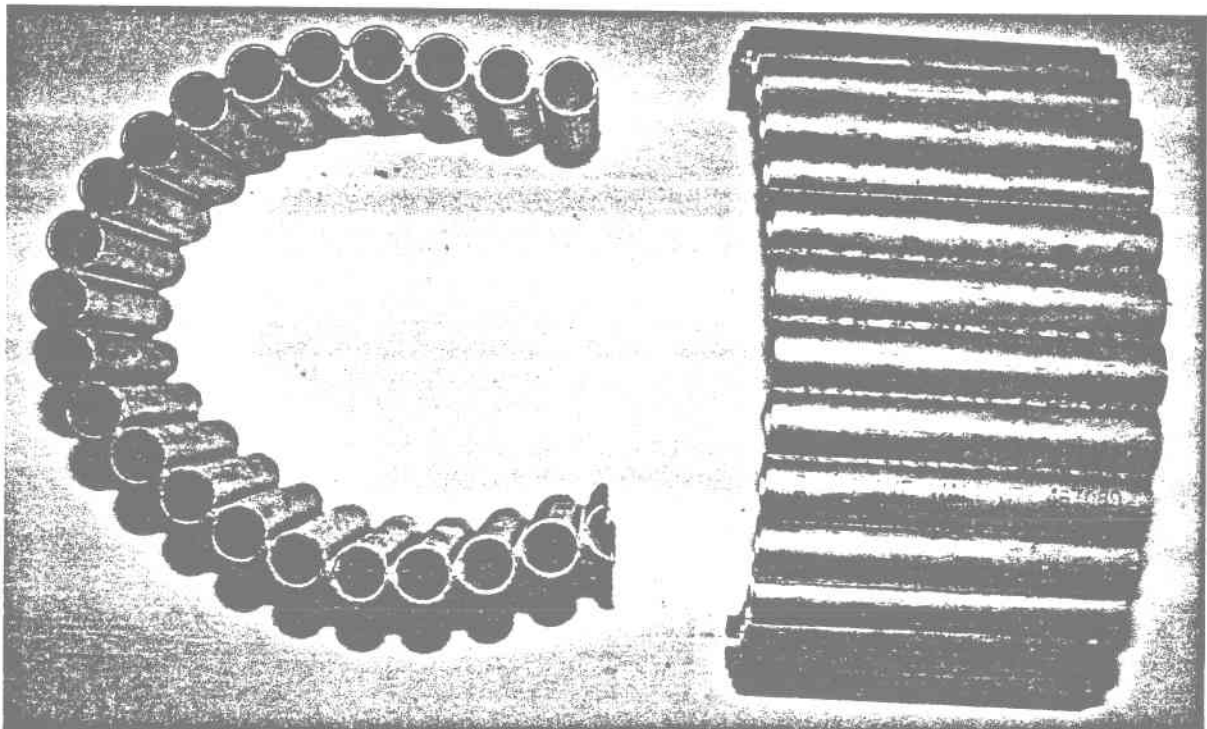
Top and Side Views of One of Two Transverse Bend Test Specimens
